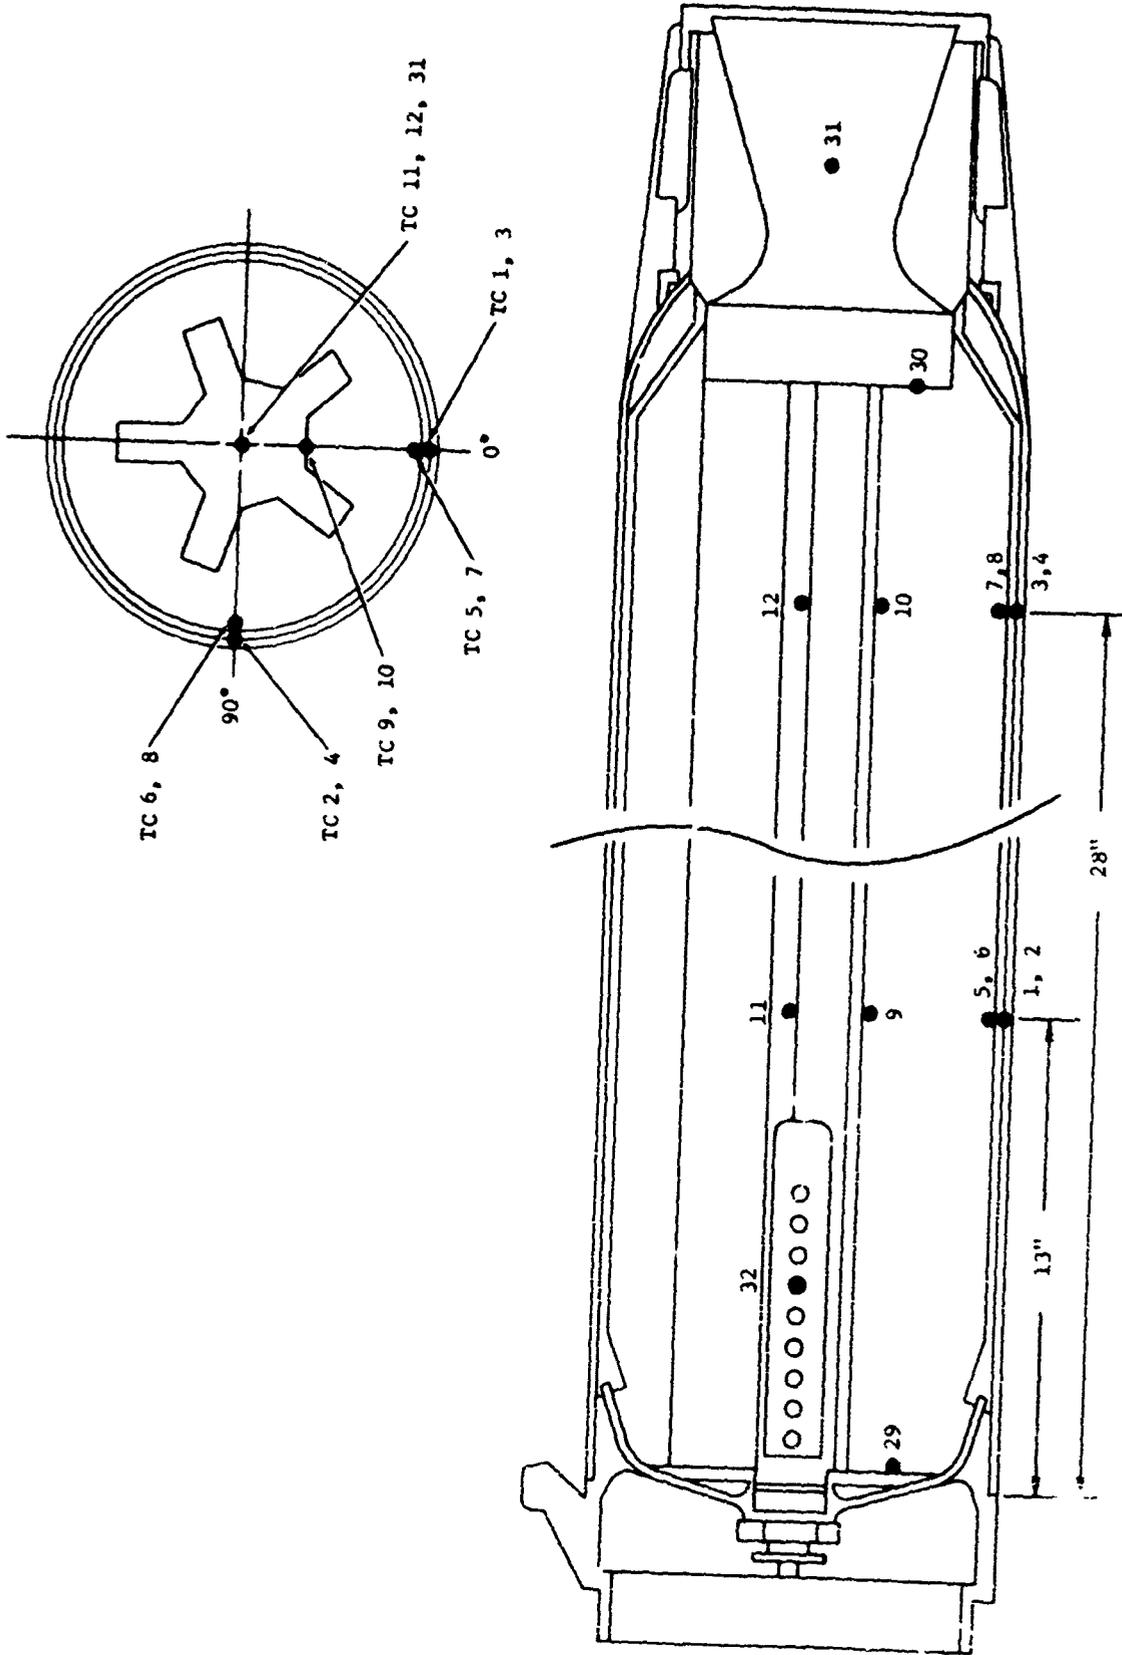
MK 39 Mod 7 Motor Thermocouple Locations
